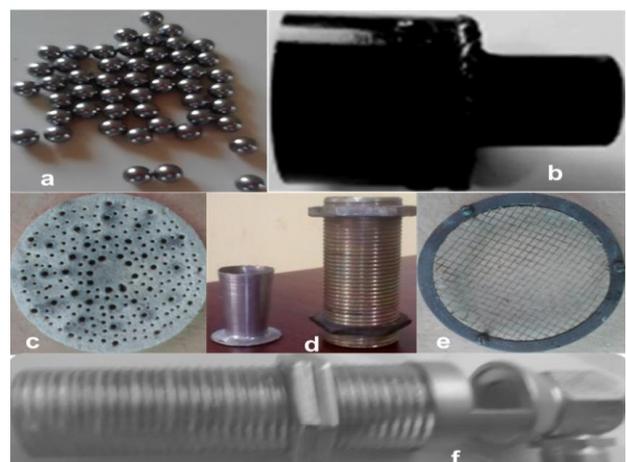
Components of the SAPSB (a) Stainless steel balls (b) burner body (c) perforated ceramic block (d) mixing tube with nozzle (e) wire mesh with supporting frame (f) mixing tube with nozzle and fuel ejector assembly.
